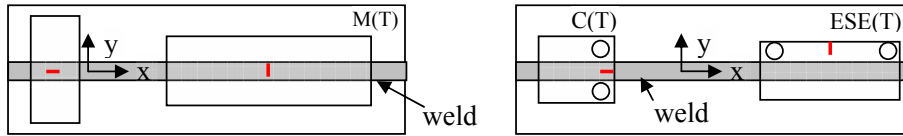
Schematic drawing showing type of M(T), C(T) and ESE(T)
